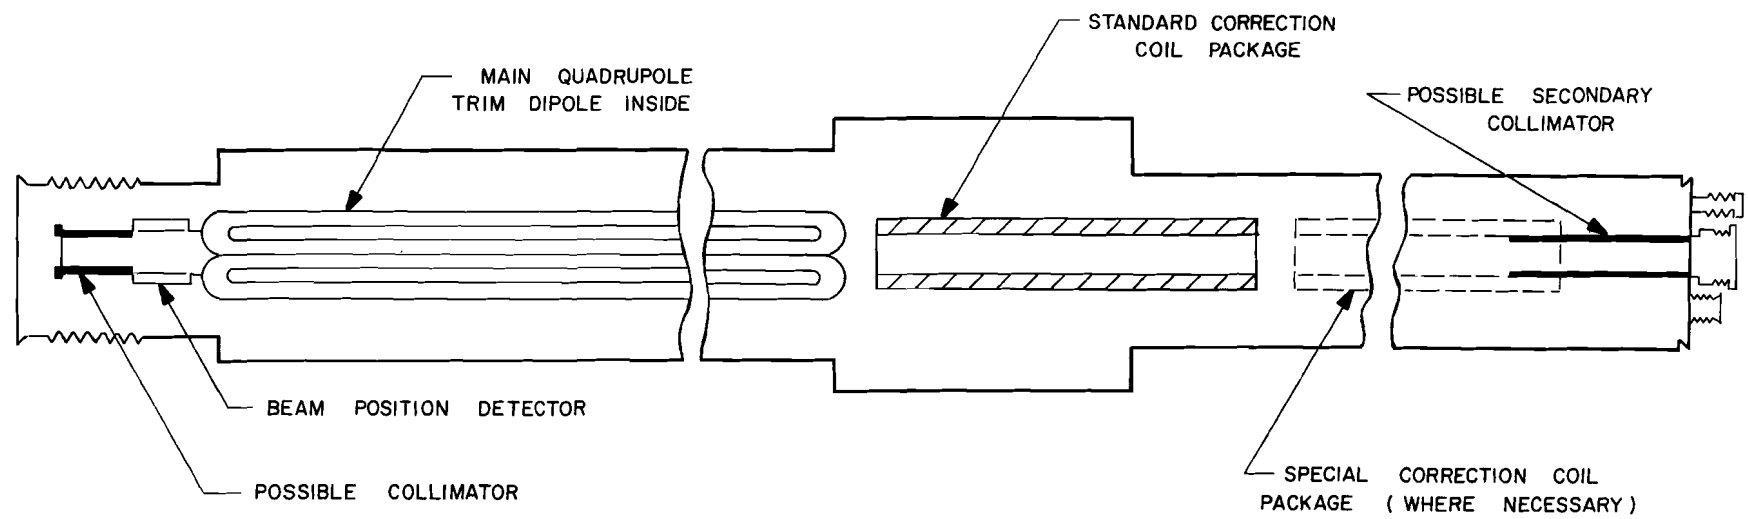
Longitudinal cross section of quadrupole and correction coil assembly.
